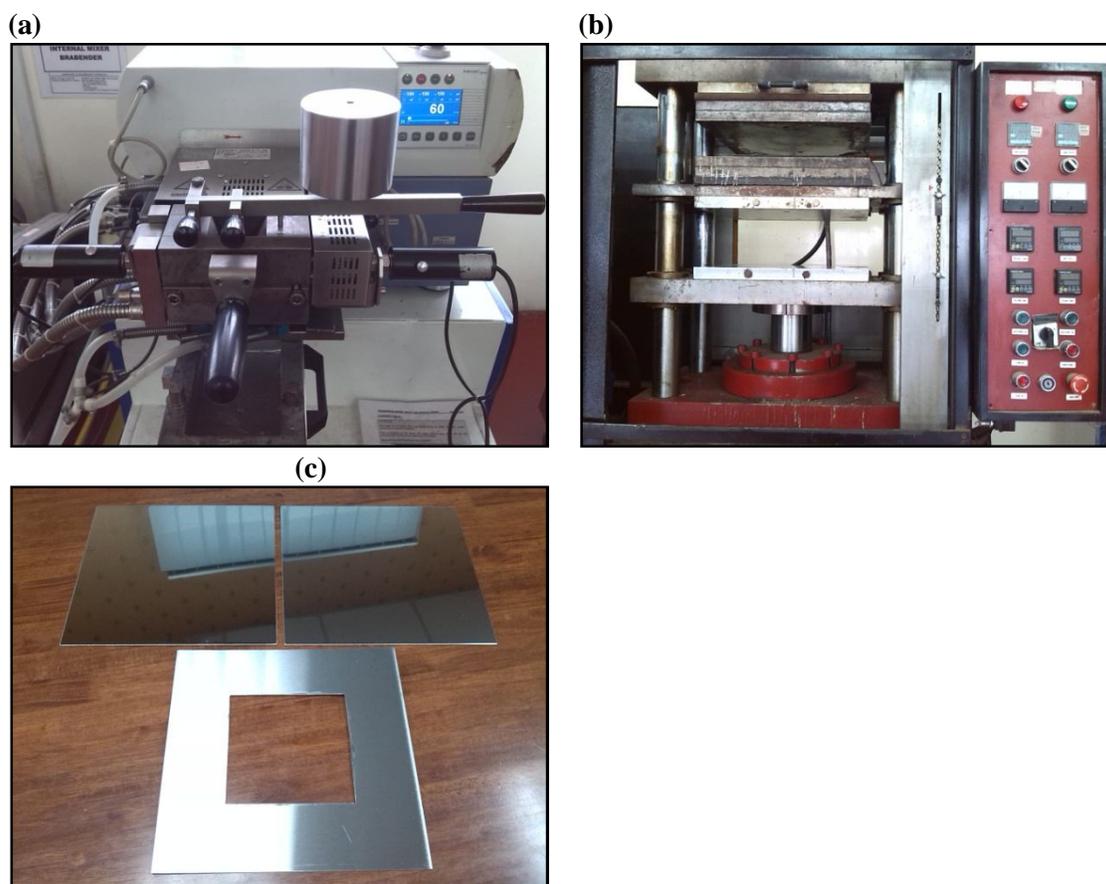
Photographs of (A) Internal Mixer, (B) Hydraulic Hot Press Machine, and (C) Sheeted Mould with Covers
